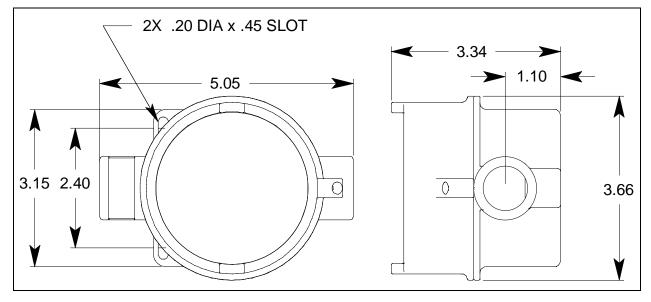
49-4000RK-SS Stainless Steel Junction Box Outline and Mounting Dimensions
